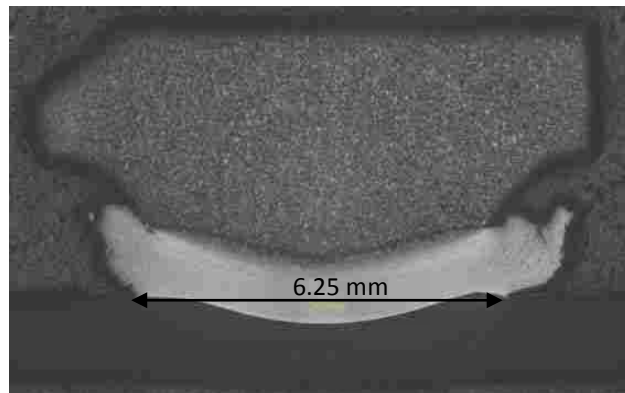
Cross-Section View of Bit to Steel Weld for Model Validation
